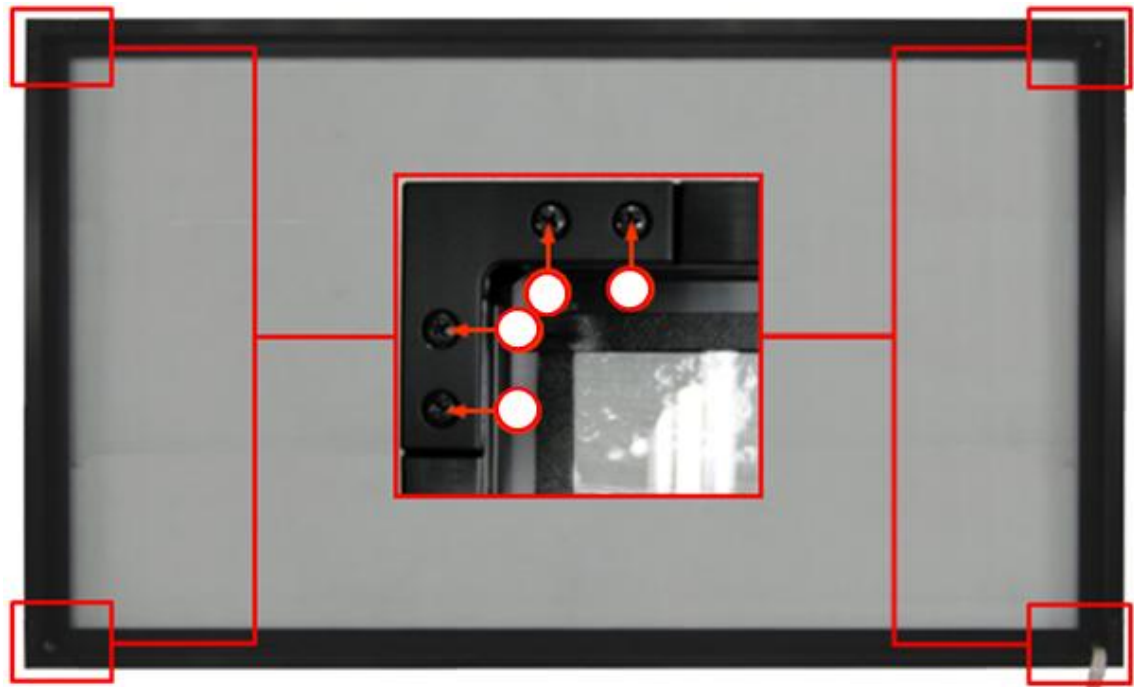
Remove screw 16EA & Disassemble corner metal fixer 4EA
